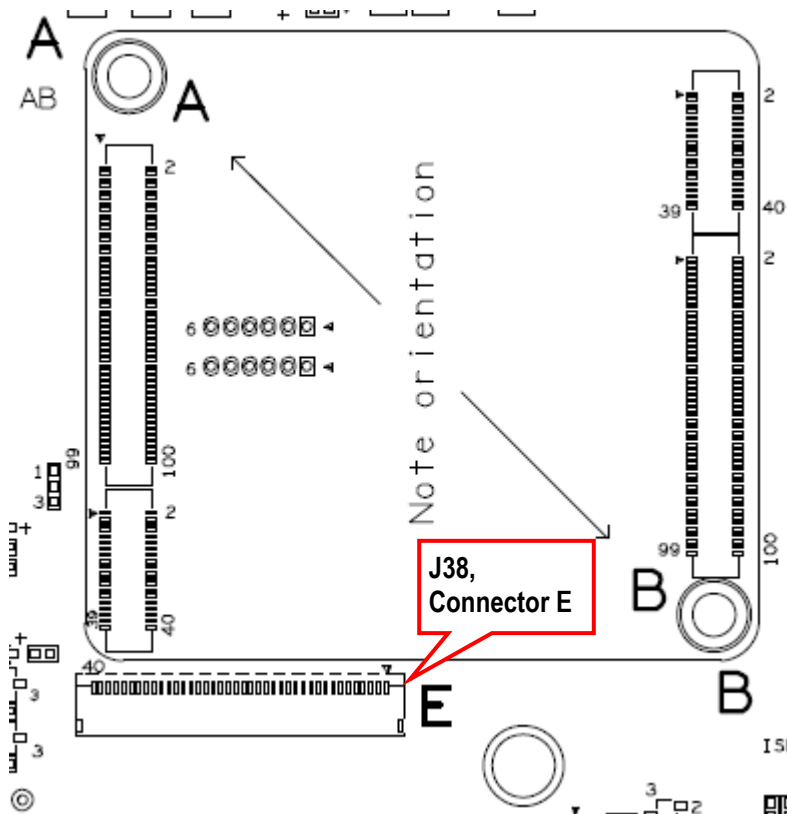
uCOM Carrier Board rev B, Gigabit Ethernet Interface Adapter
